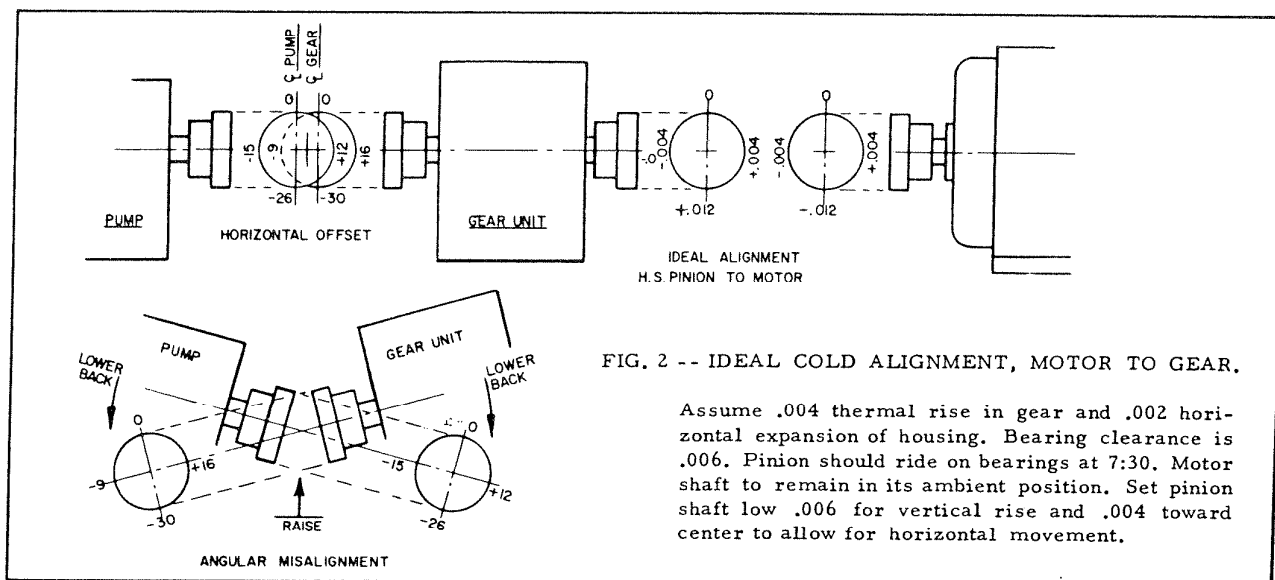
IDEAL COLD ALIGNMENT, MOTOR TO GEAR.
